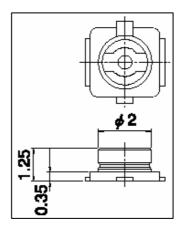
Mechanical dimensions of U.FL-R-SMT connector
